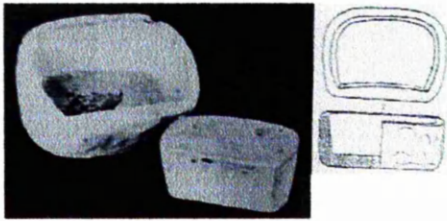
One-piece outer mould for kidney-shaped pillow and pillow made from a similar
